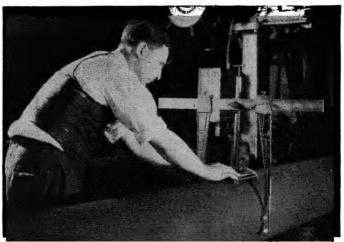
Using a special caliper to measure the crown of a rubber-covered paper-mill press roll.
